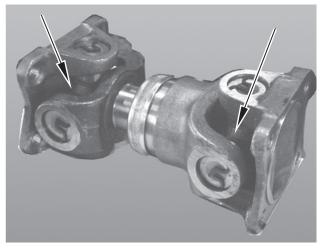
Drive Shaft Universal Joint Grease Fittings
